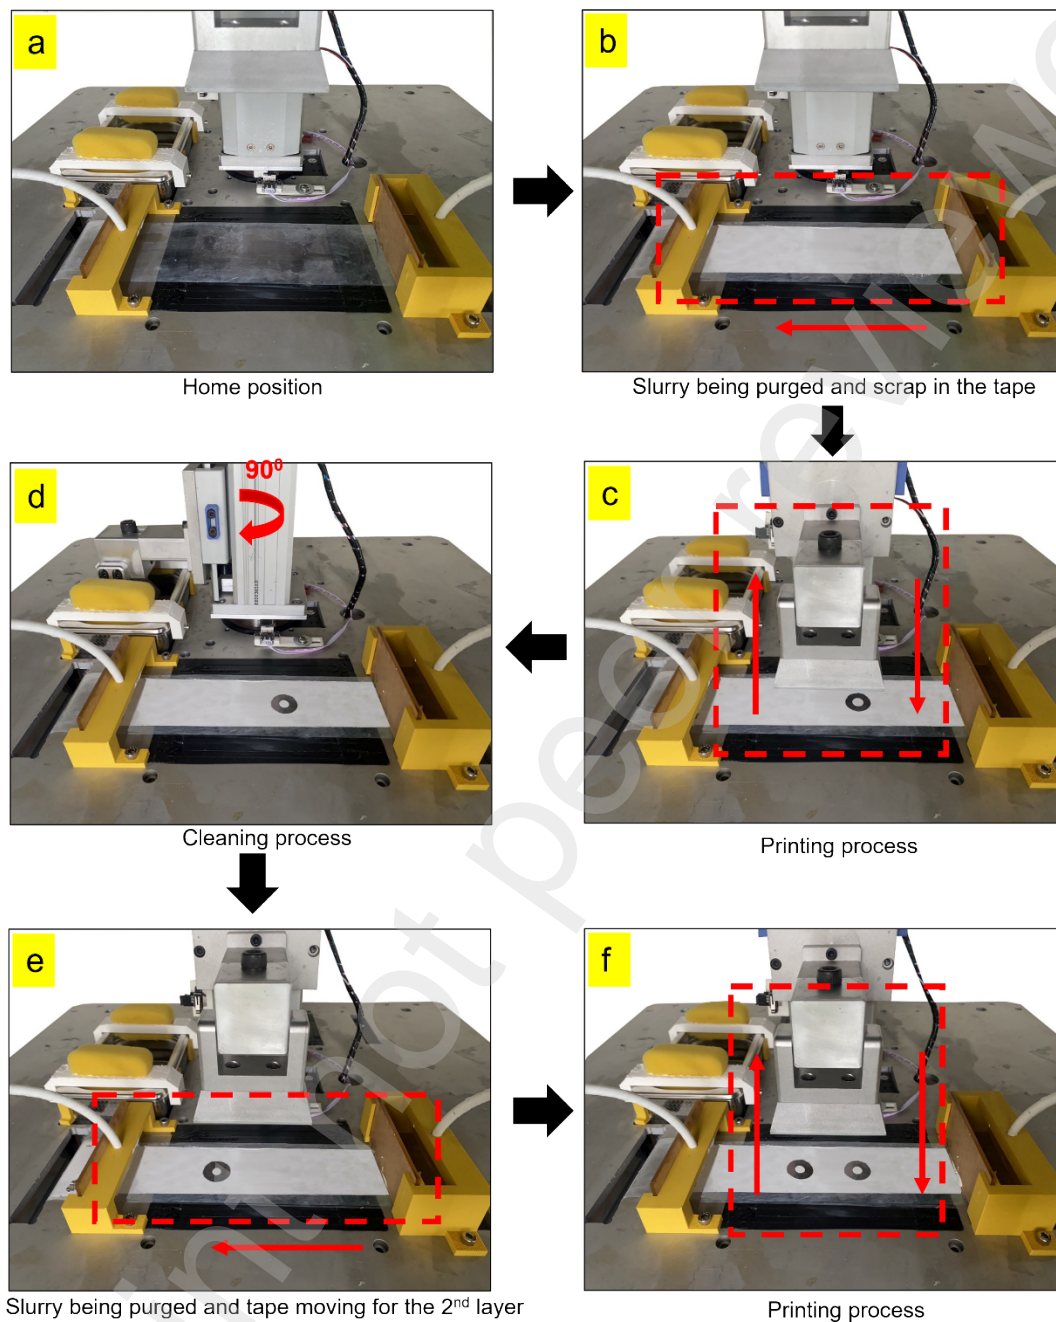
Working demonstration of multi-slurry tape-casting 3D printer (a) home position (b) scrapping process (c) printing process (d) cleaning process (e) tape moving for the next layer (f) printing process
